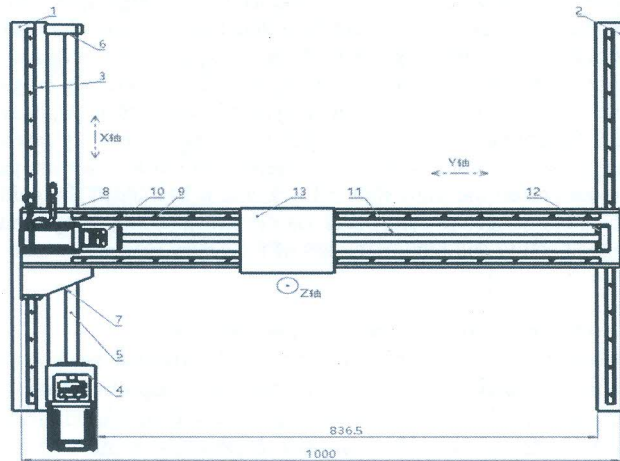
Structural Design Drawing of Large Span Single-drive Gantry
